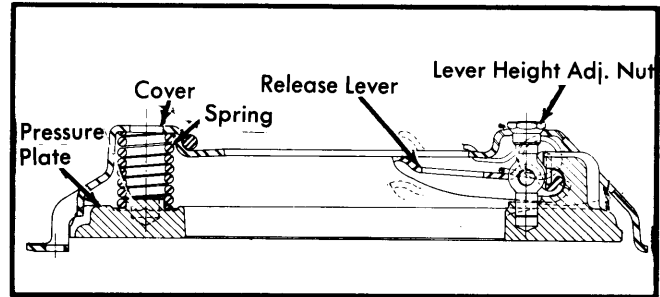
Cross Sectional View of Chrysler Corp. Clutch (Except Horizon & Omni)
